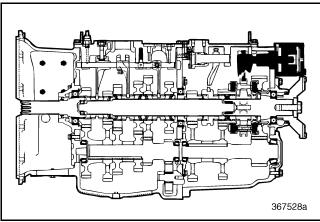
Range Shift Cylinder Component Locator (T313L/T318L Shown)
